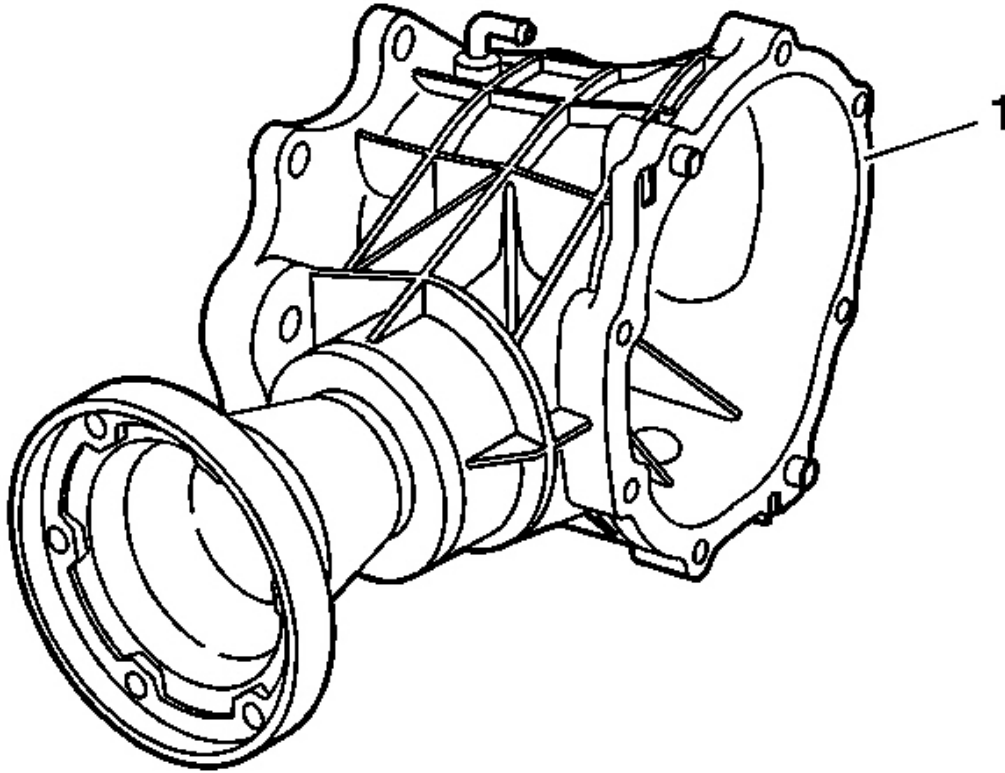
Cleaning Carrier Assembly Housing Sealing Surface
